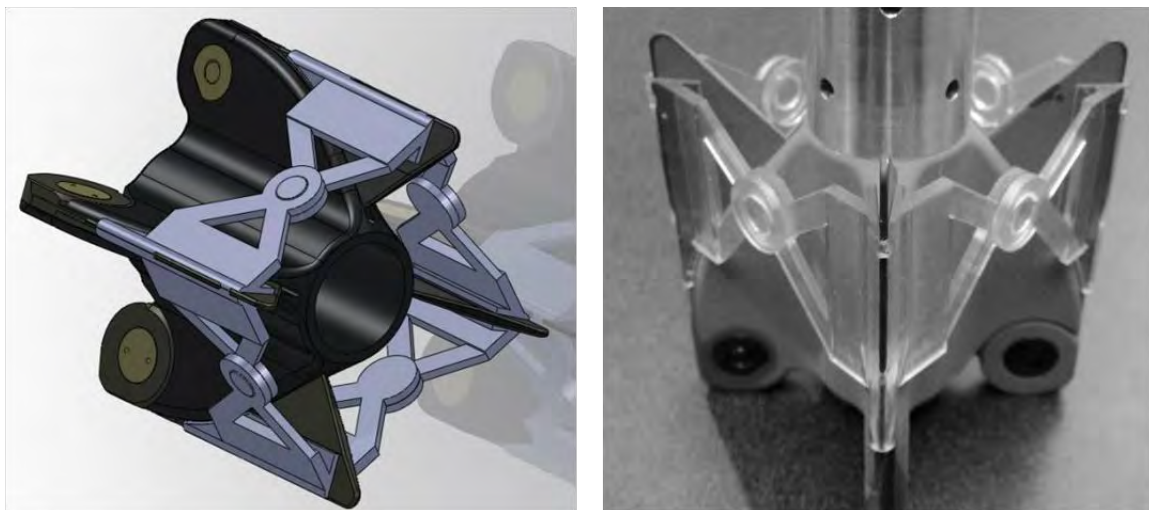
SolidWorks rendering and prototypes assembled FRD on existing fin set.
